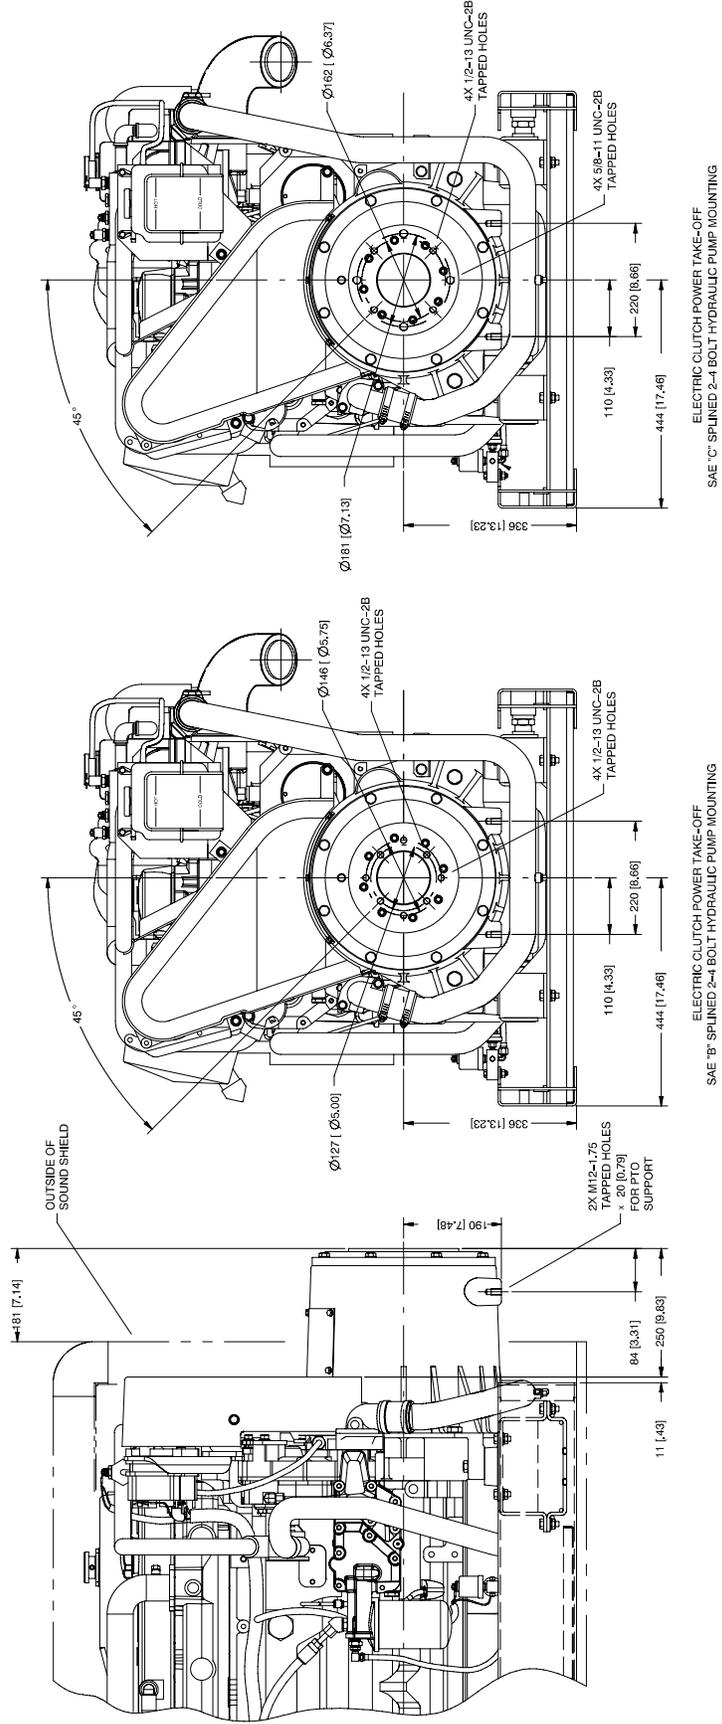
Dimension Drawing, 80/99EOZD and 70/80EFOZD with Sound Shield
